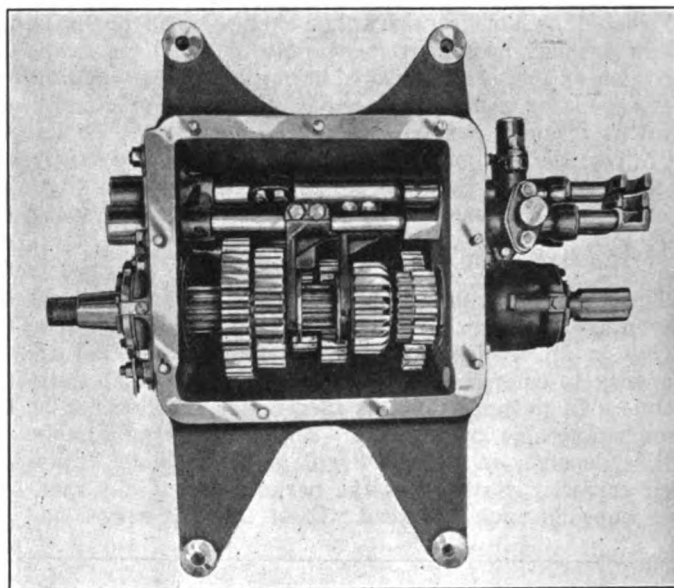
THE FOUR-SPEED GEAR TRANSMISSION
